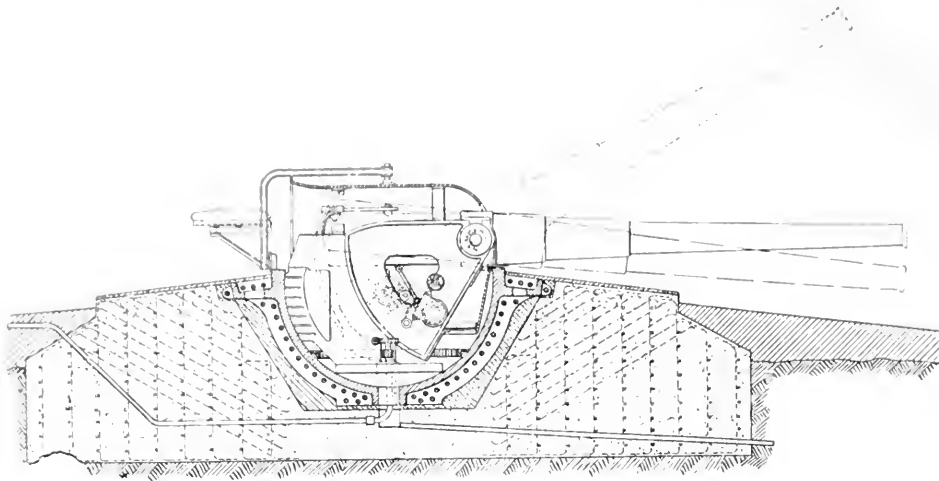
SECTION OF COAST-DEFENSE GUN WITH SPHERICAL MOUNT
